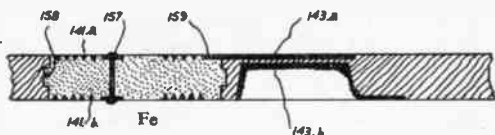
Section of a moulded plate, part of which is filled with iron dust.
